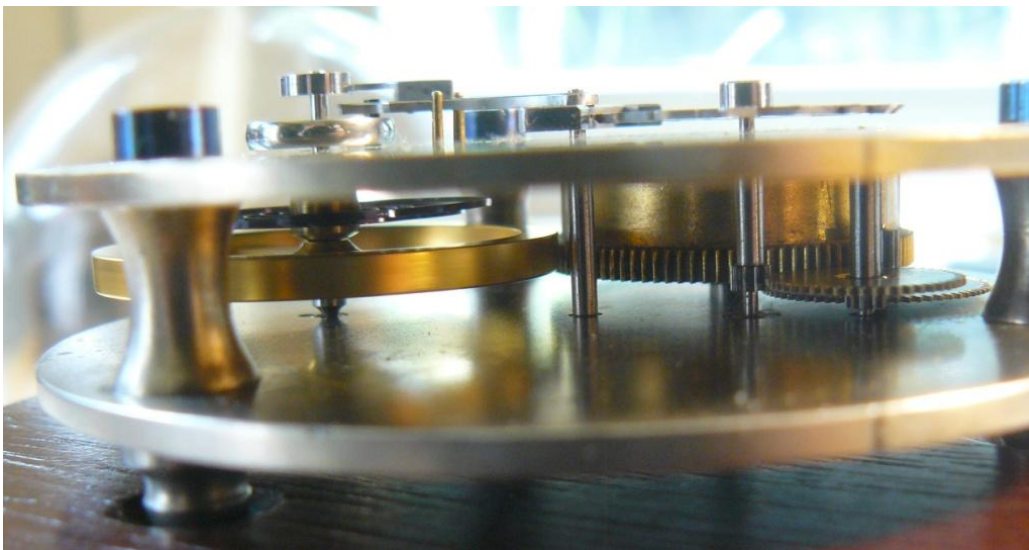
Balance wheel and -spring, spring barrel with two-wheel gearing to the escape wheel.
